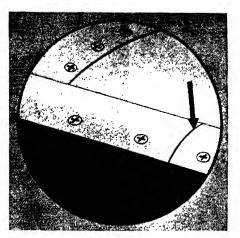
Detail showing fastening of boot to aircraft structure. (Courtesy The B. F. Goodrich Company.)
